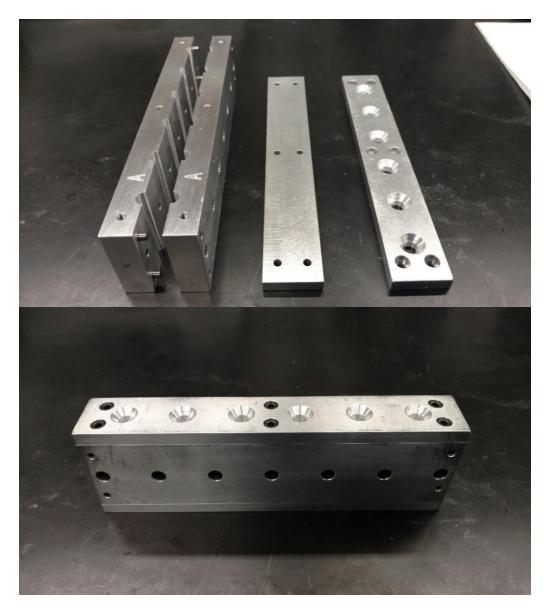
Disassembled (top) and assembled (bottom) mold for casting PDMS samples
